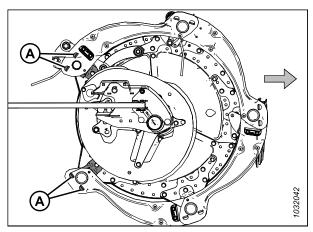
Reel Endshield Removed – Outboard Cam End
